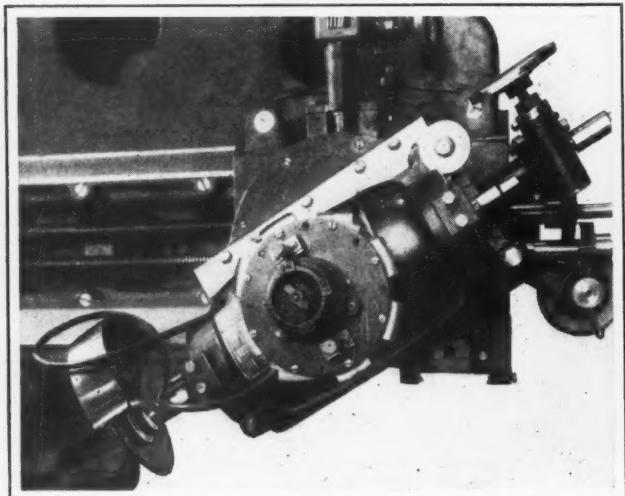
One of the Wheel-heads of Machine Shown in Fig. 1
